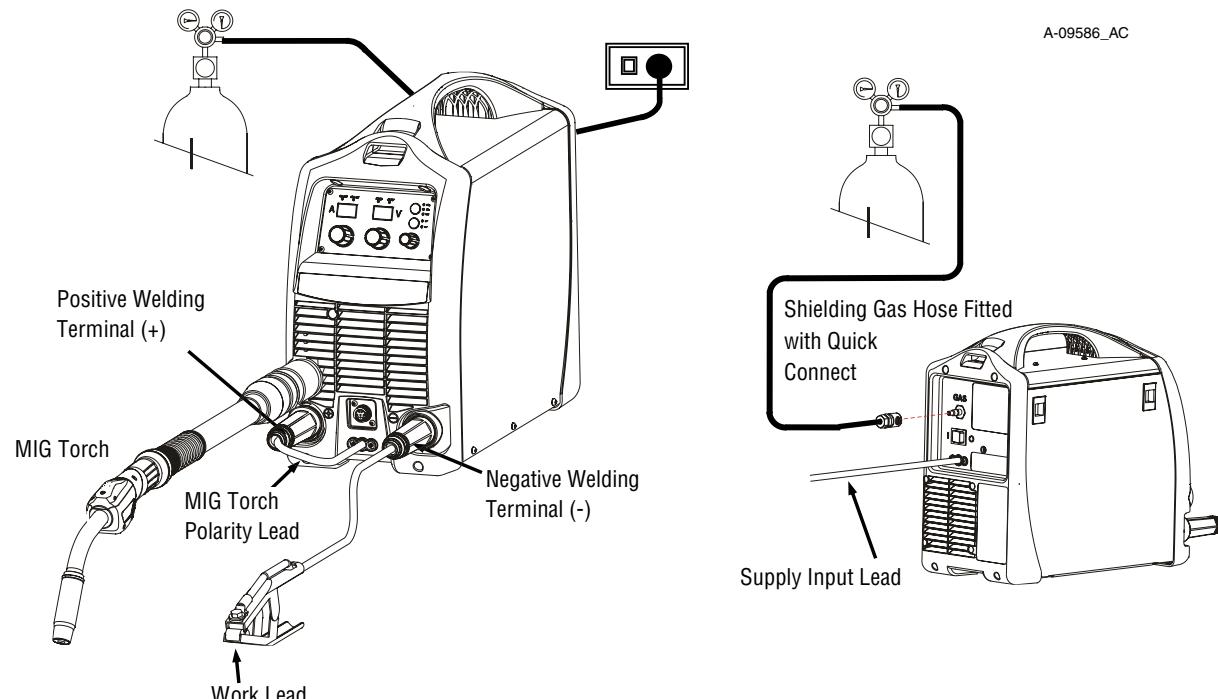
Setup for MIG Welding with Gas Shielded MIG Wire
